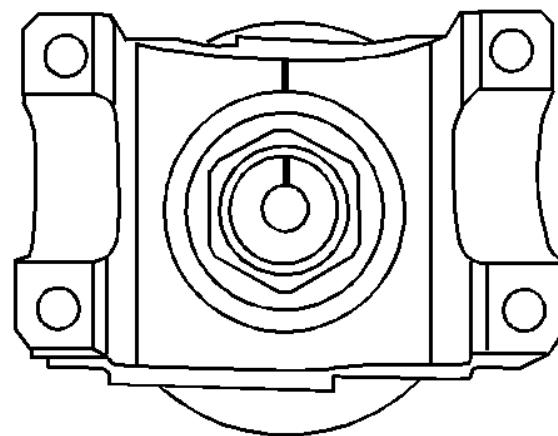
Pinion Shaft And Pinion Yoke Alignment Marks
